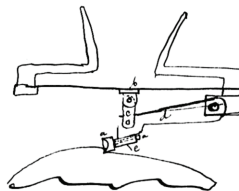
is Recorder to the usual lever I secure a holder for the record point a— This is a tube soldered to the lever The Record tool a slides into the tube & is secured by a cement preferably melted shellac. The tool is round and has a shank
